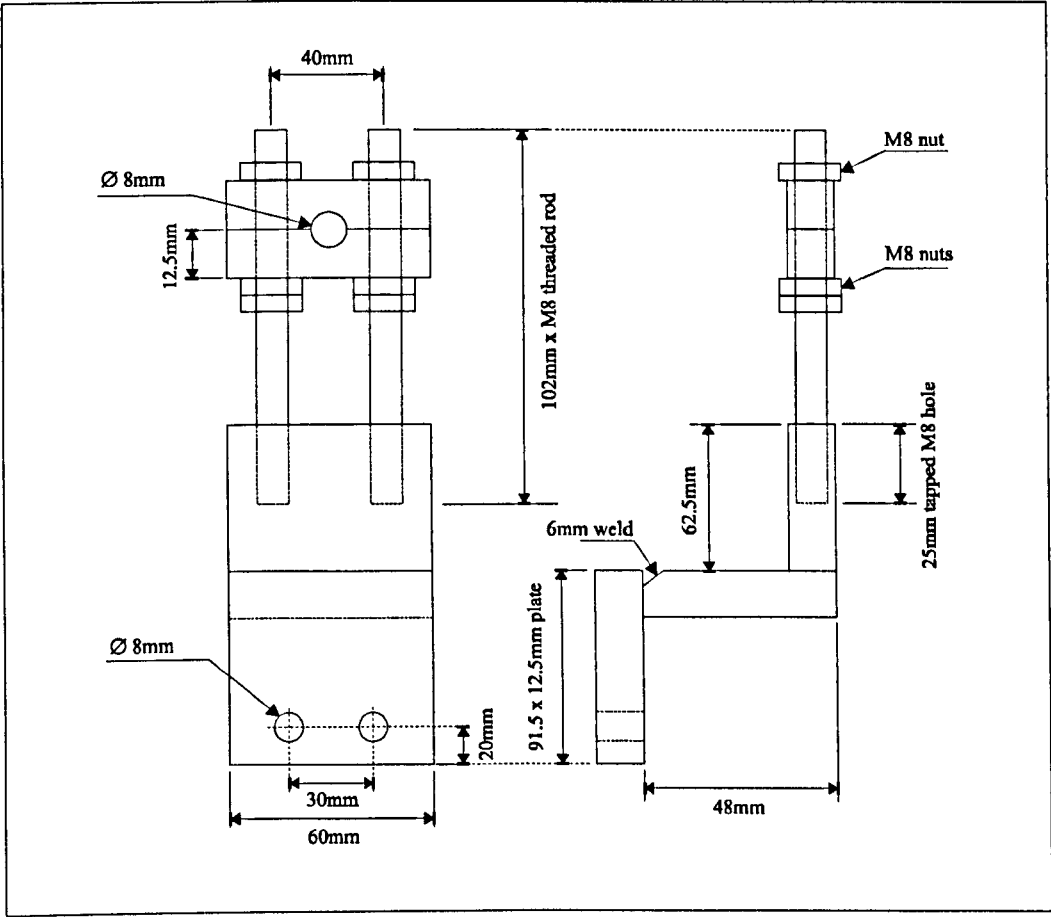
Detail of plate mounting bracket design (not to scale).
